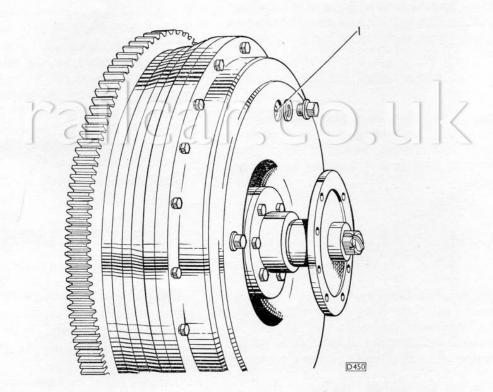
Position of filler plug hole (1) when filling or topping-up the fluid coupling.
